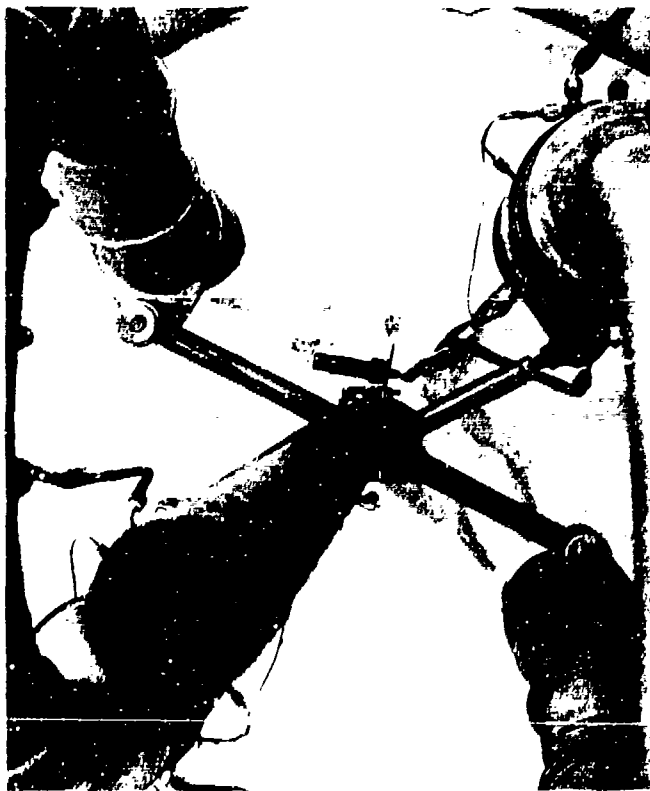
AXIAL VIEW OF IMPROVED COMBUSTOR SUPPORT MECHANISM. JOINTED ATTACH ARM ON COMBUSTOR PERMITS DIFFERENTIAL MOTION BETWEEN TAILPIPE AND INLET
